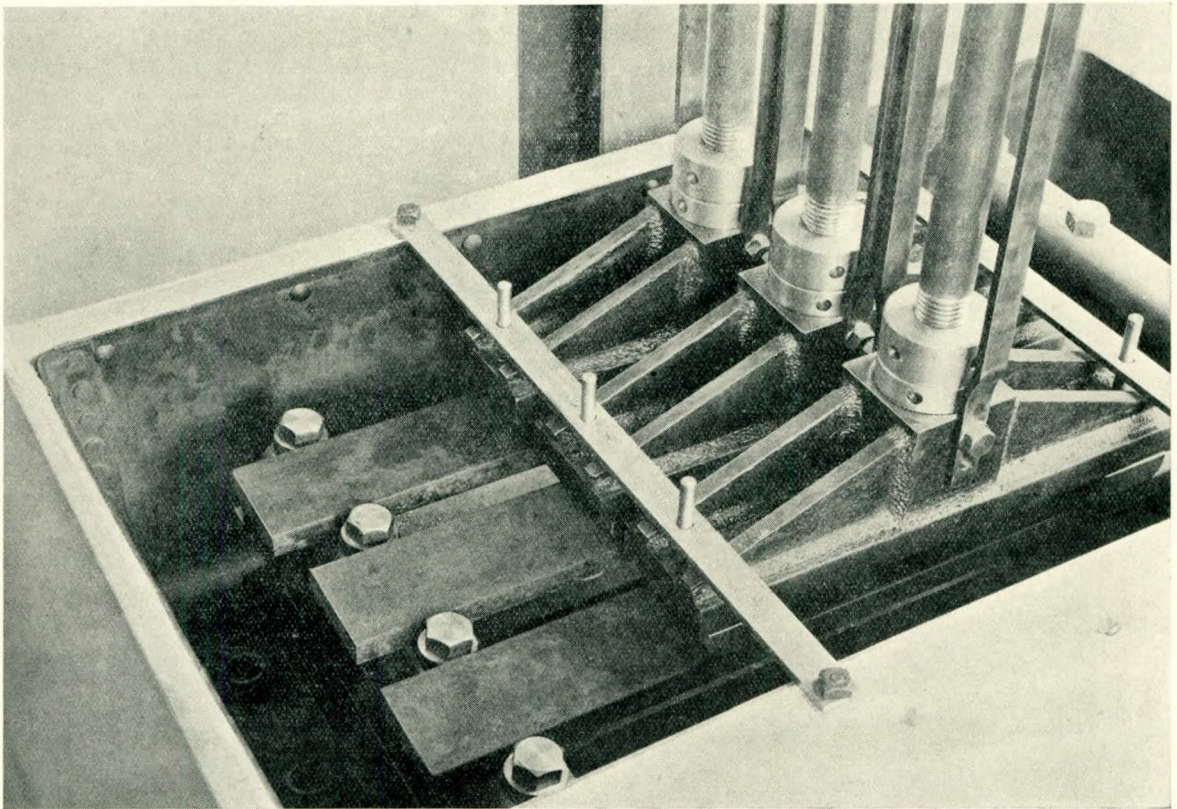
Machine for testing boiler plates and joints: loading arrangement.
